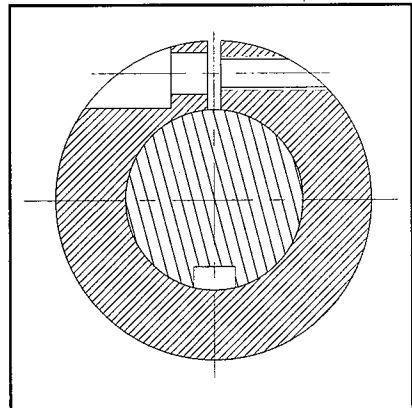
Position the slot of the impeller shaft opposite the motor shaft keyway.
